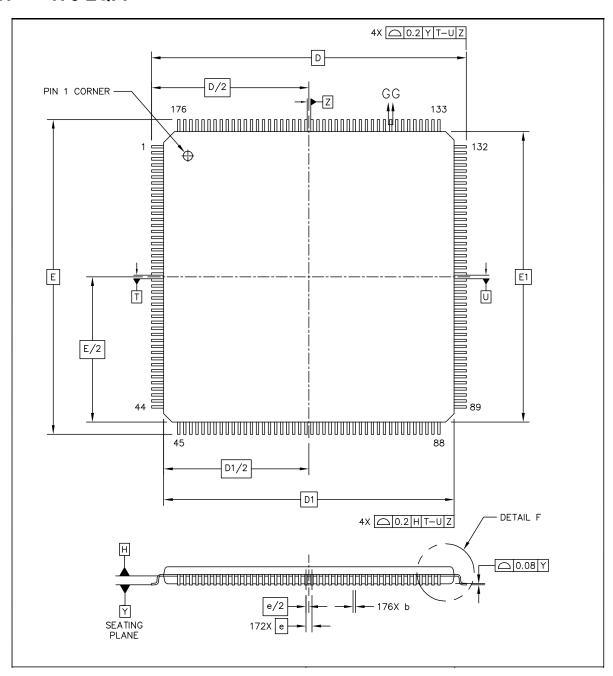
176 LQFP package mechanical drawing (Part 1 of 3)
